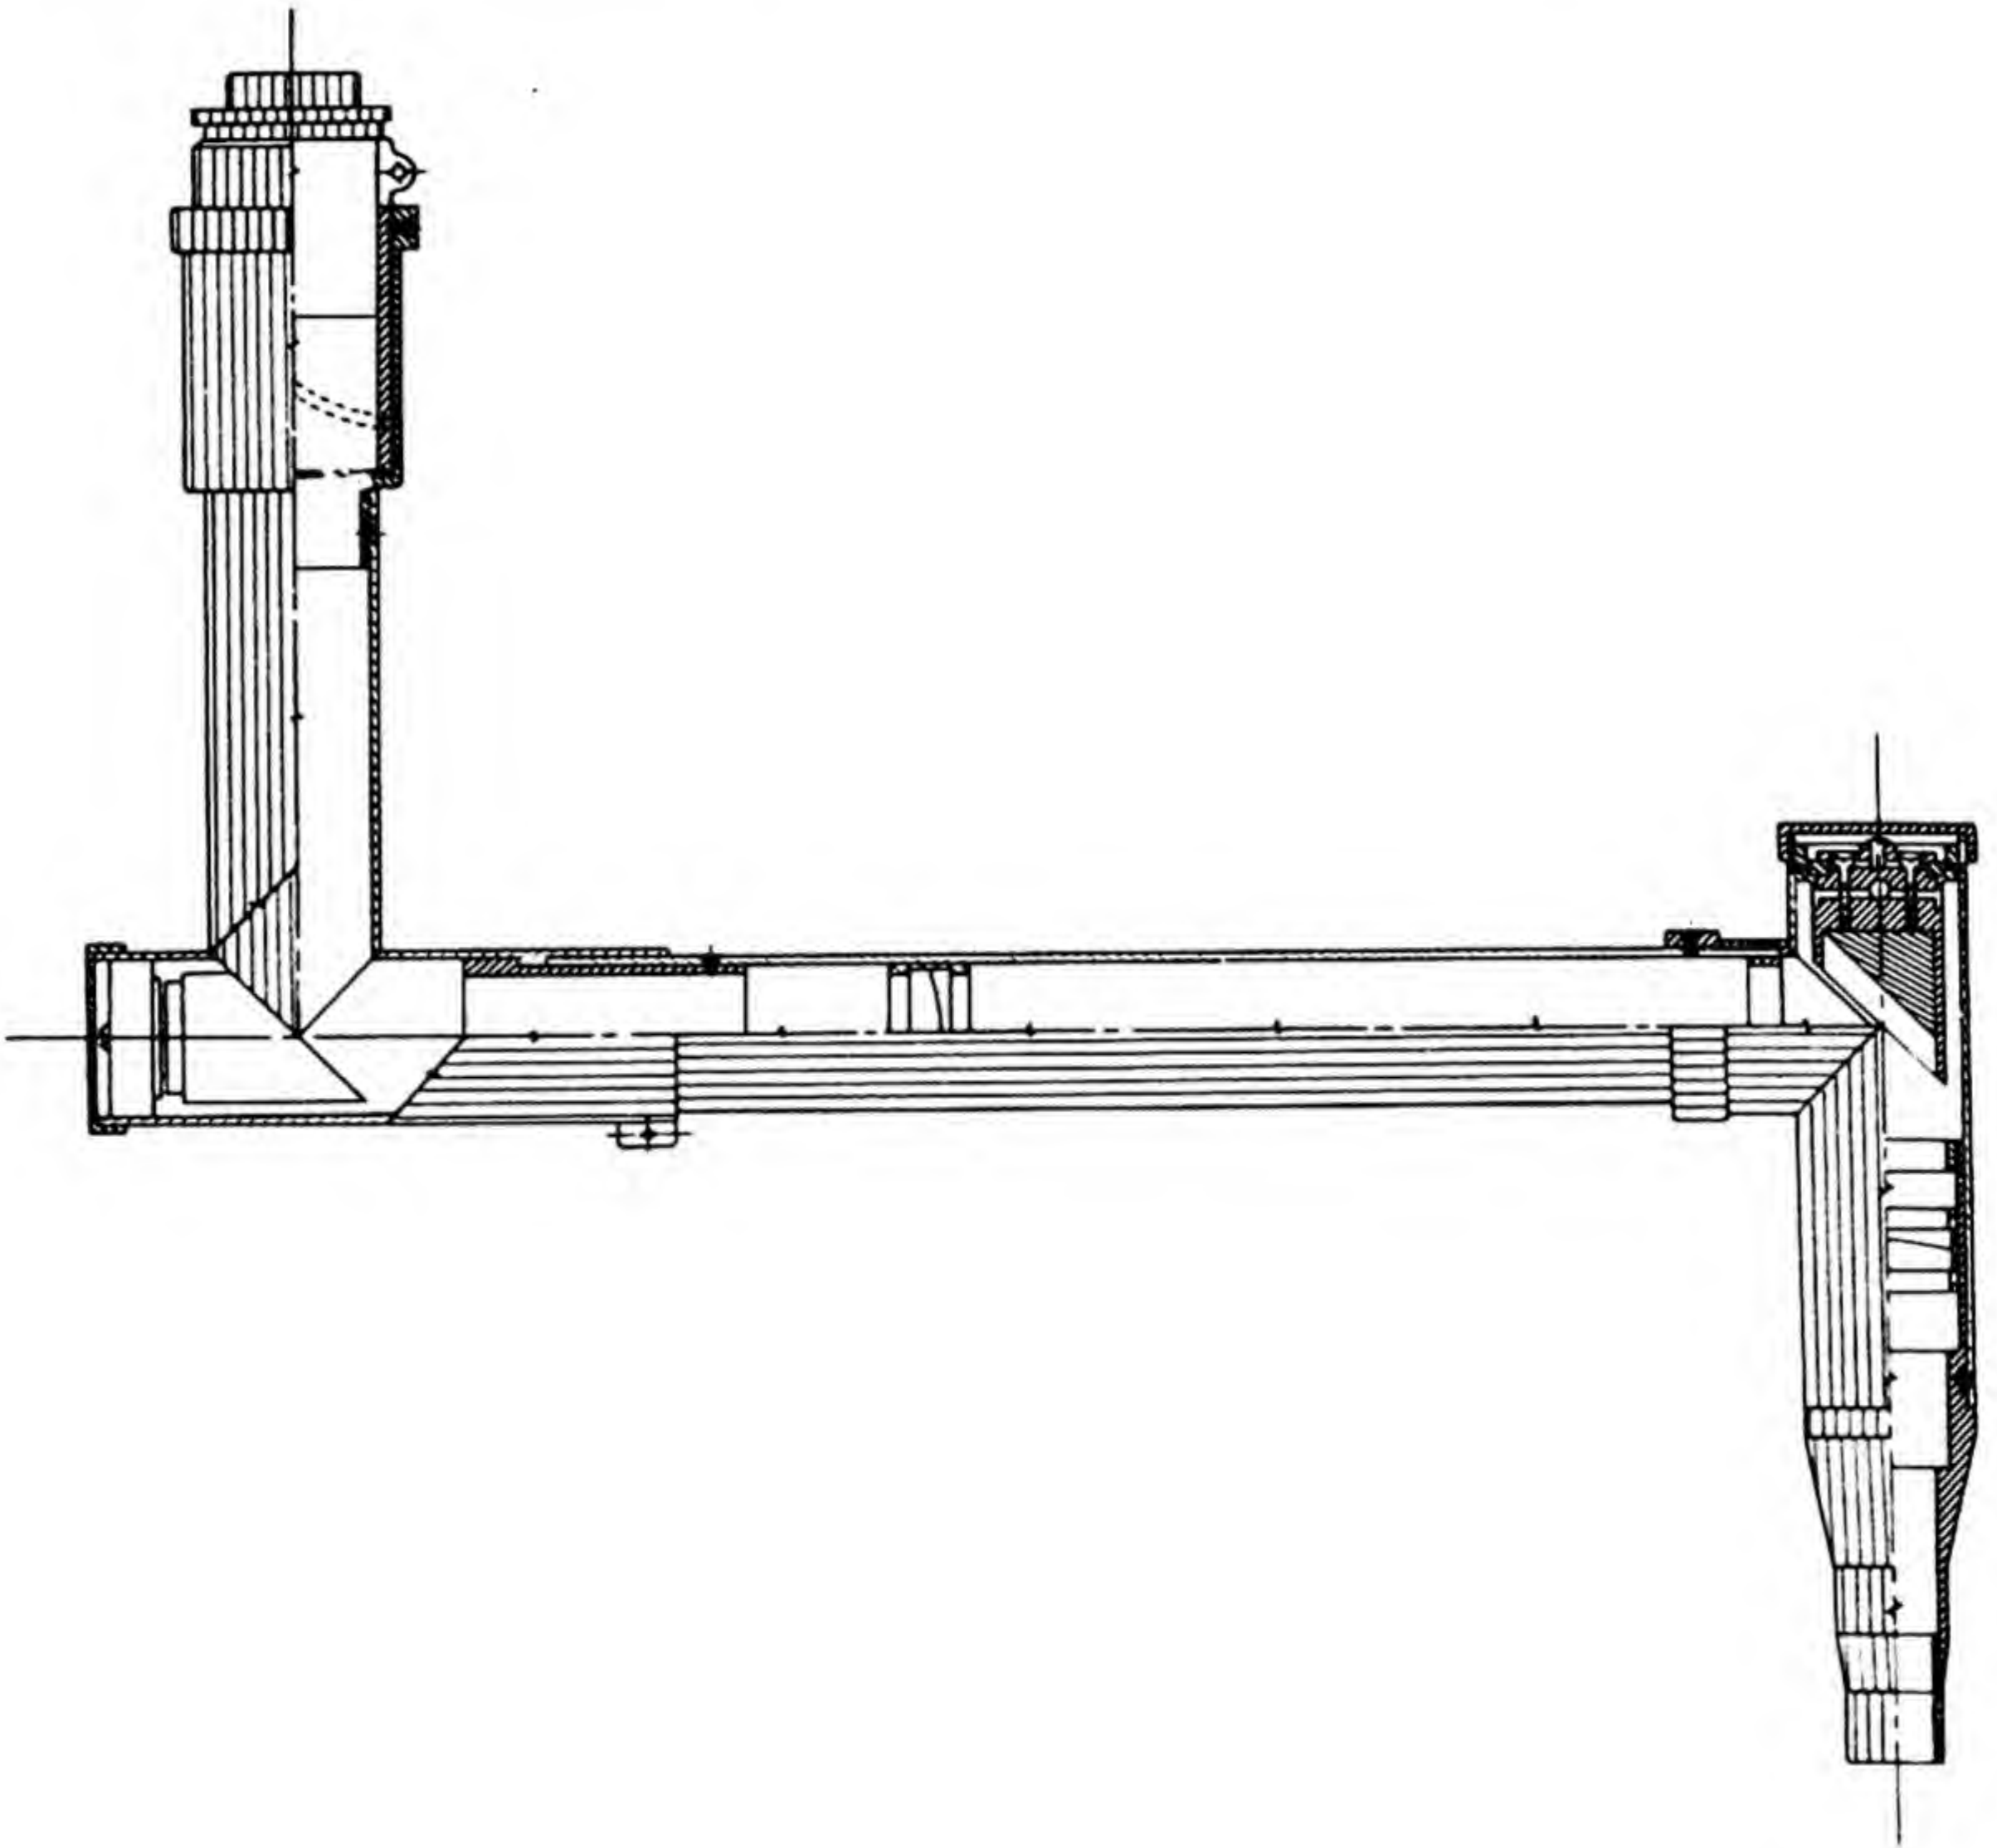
Broken-away drawing of the chemiscope eyepiece assembly (type A).
